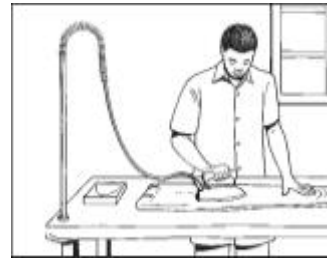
Industrial ironing machine with elastic spring to reduce worker fatigue
